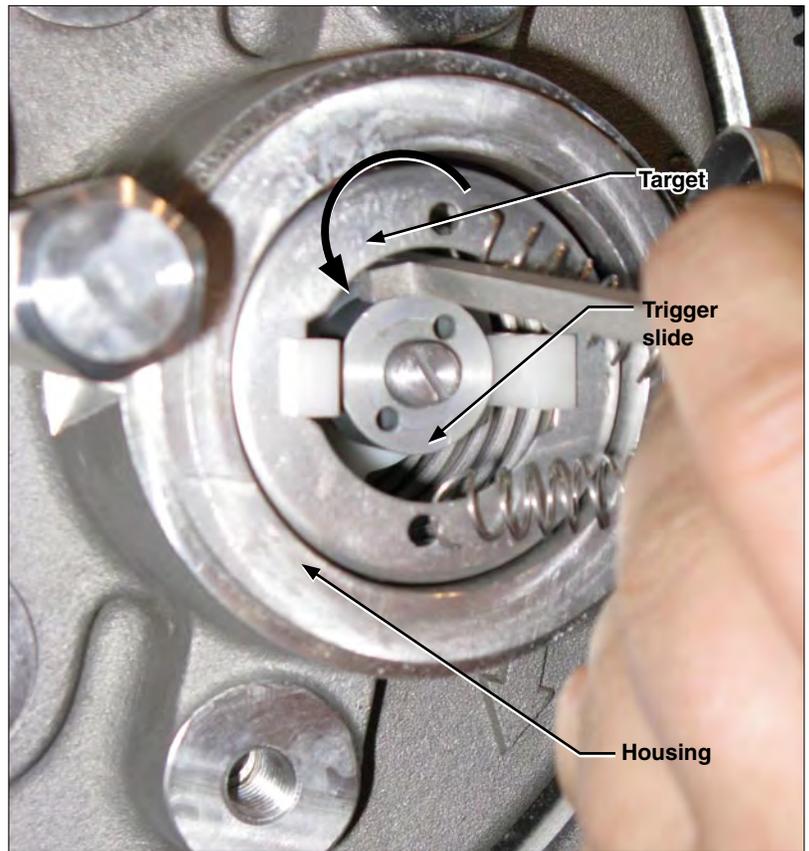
Carefully insert the inspection tool. Rotate the top tooth to the center of the trigger slide.
